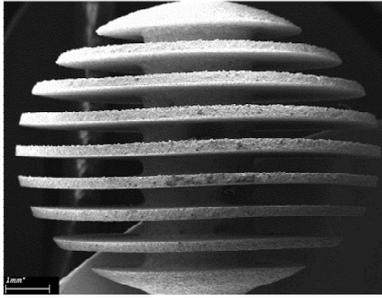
Complex macro and micro dimension of Ti6Al4V parts with tiny details of features
